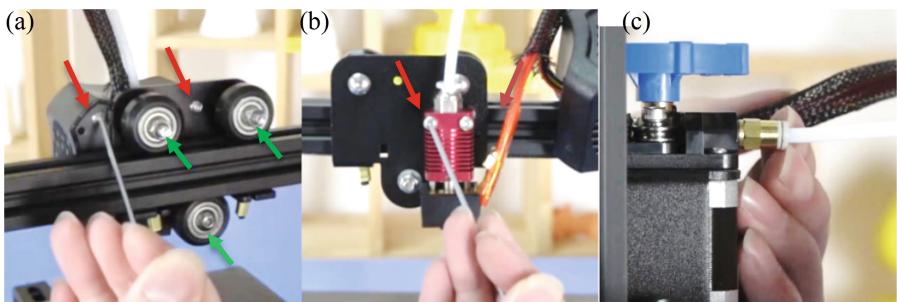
Manufacturer's instructions for removing the stock filament hot-end. (a) Removal of the screws holding the fan enclosure. (b) Removal of the stock hot-end and (c) removal of the Bowden filament tubing and pneumatic connector [21]. (Color figure online)
